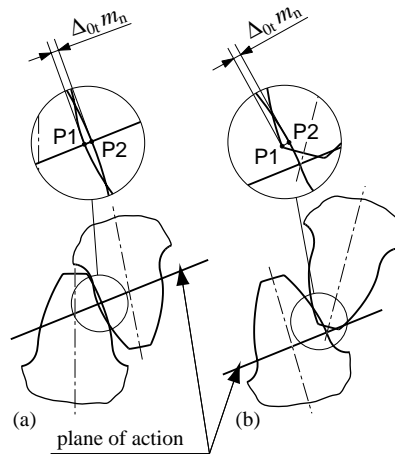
Contact between two gears in the transverse plane for (a) an involute/involute contact and (b) an involute/tip rounding contact.
